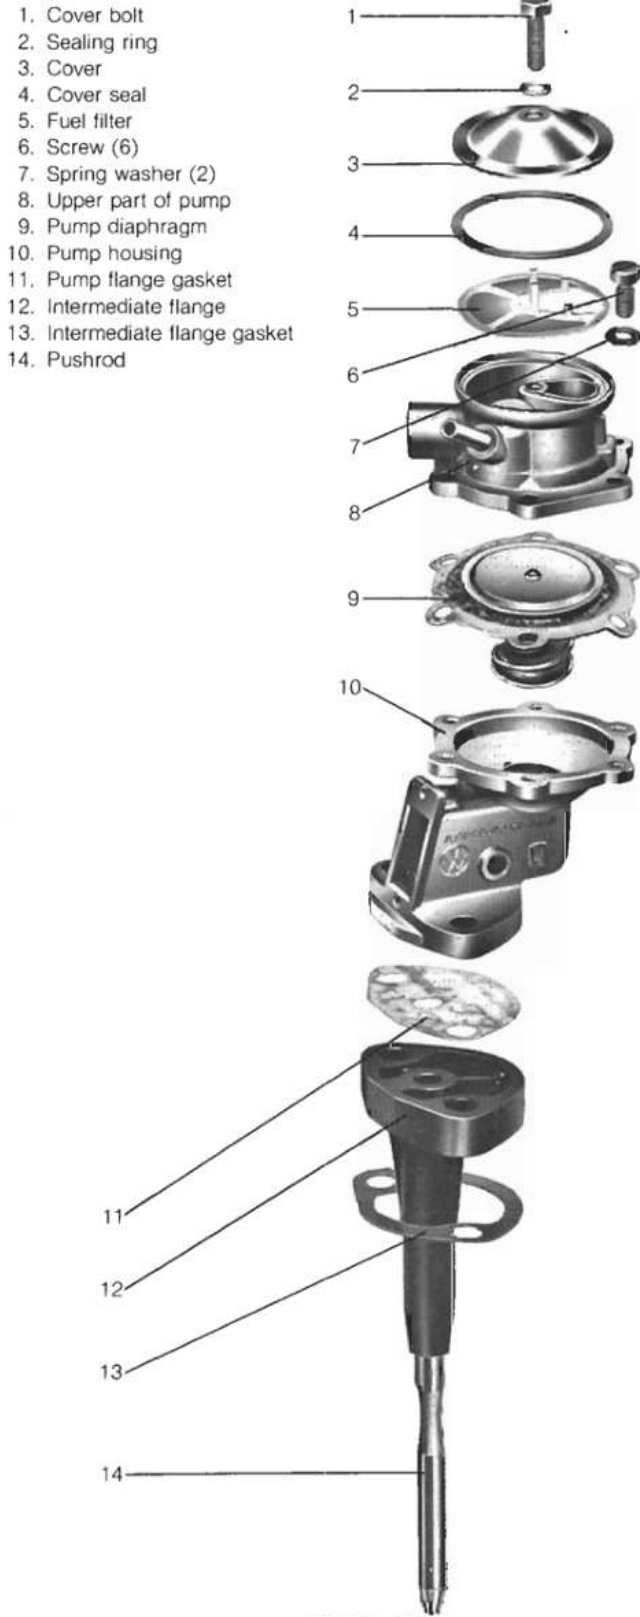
Replaceable parts of dual-carburetor engine fuel pump.
